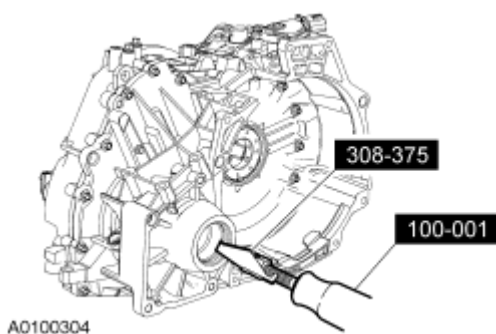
Removing RH Differential Seal Using Special Tools (2 Of 2)
